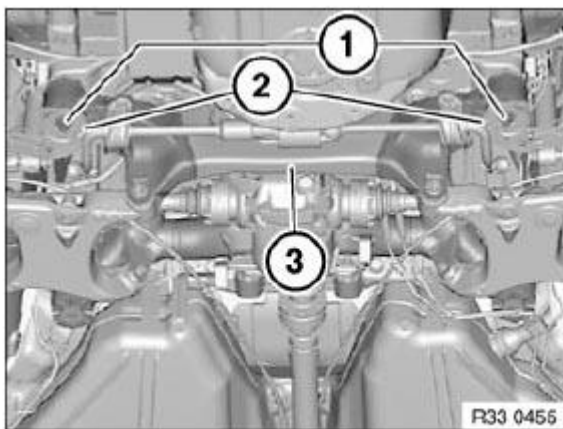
Identifying Rear Axle Carrier And Stop Plate
